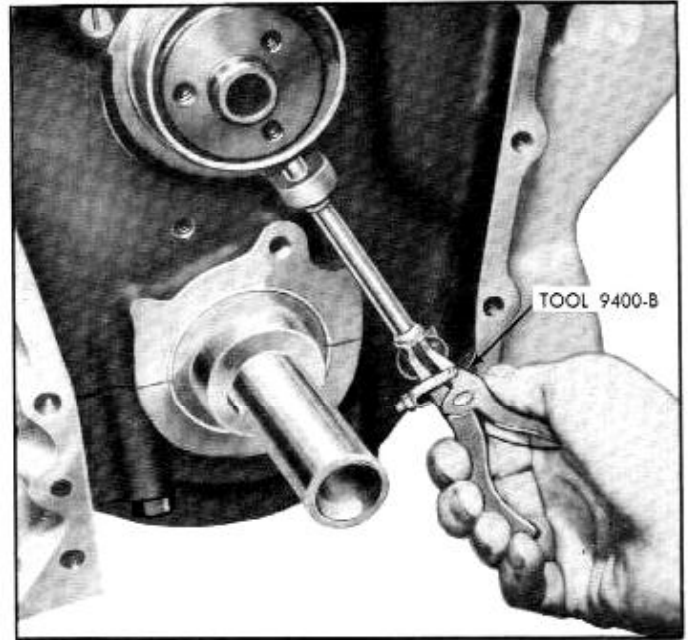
C-46—Removing Fuel Pump Snap Ring Retainer
